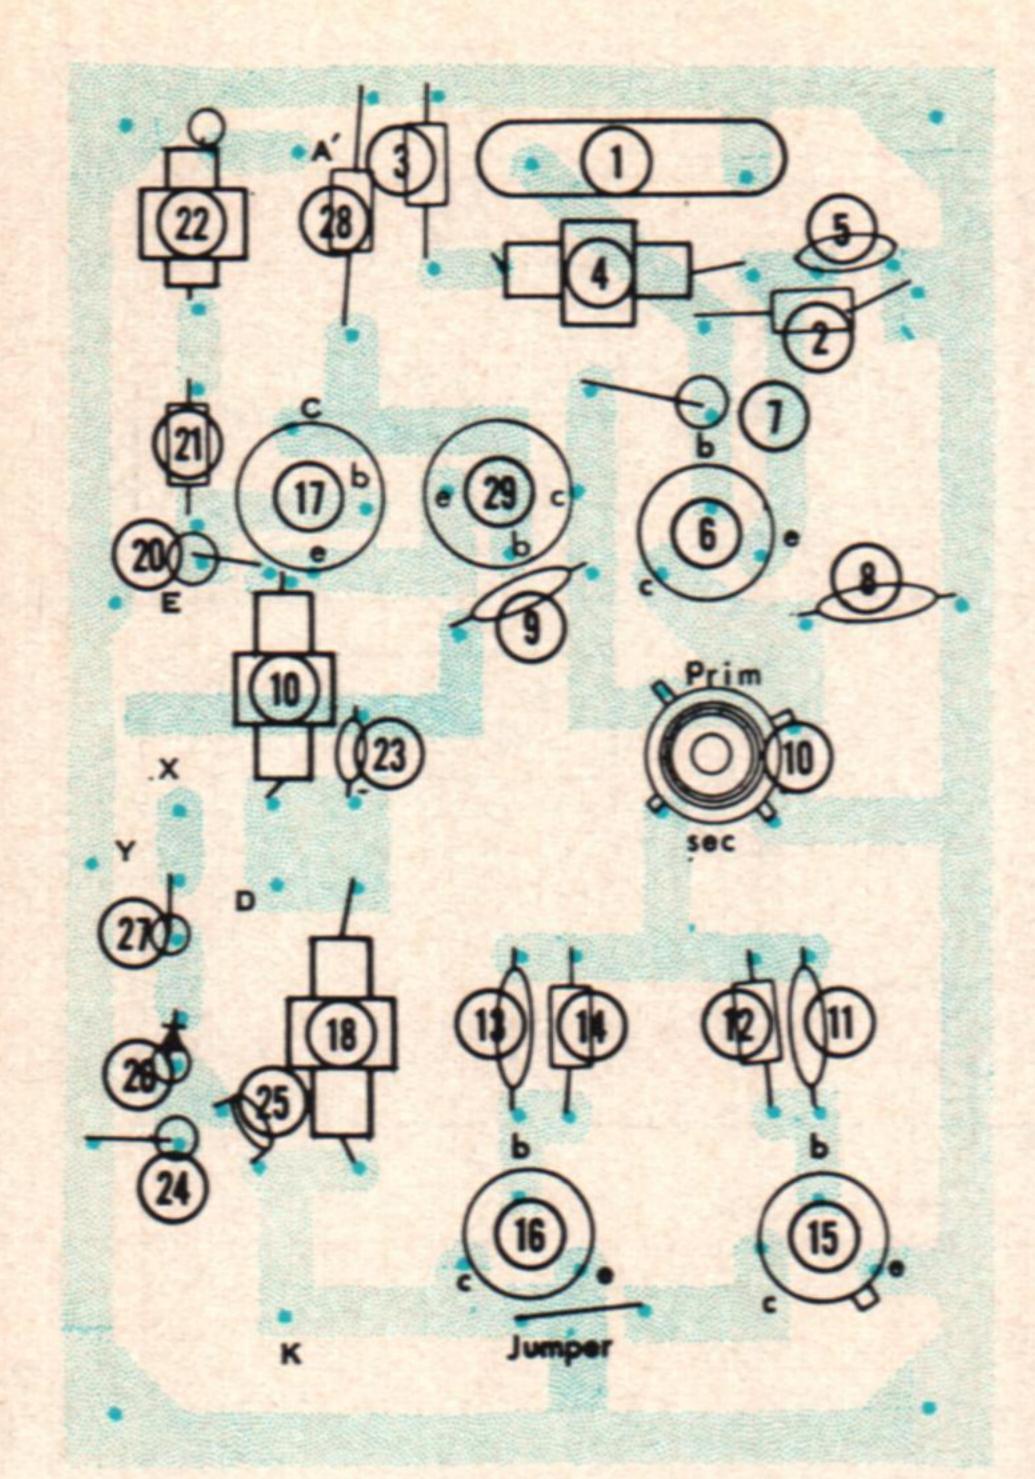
RF-section component location, top view. Assemble in order of numbers on each part. Shown full size. Heat sink on transistors #16 and #17.
